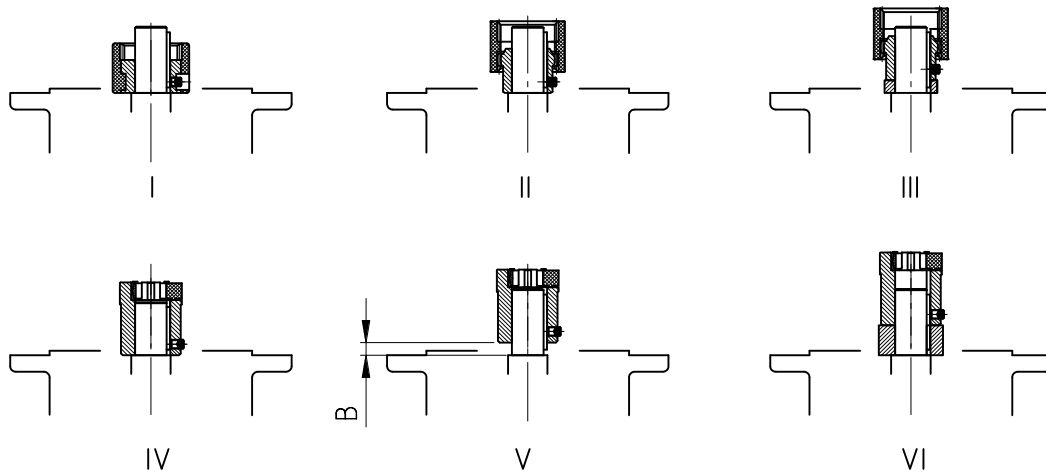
Fitting the coupling onto the motor shaft - various types of coupling
